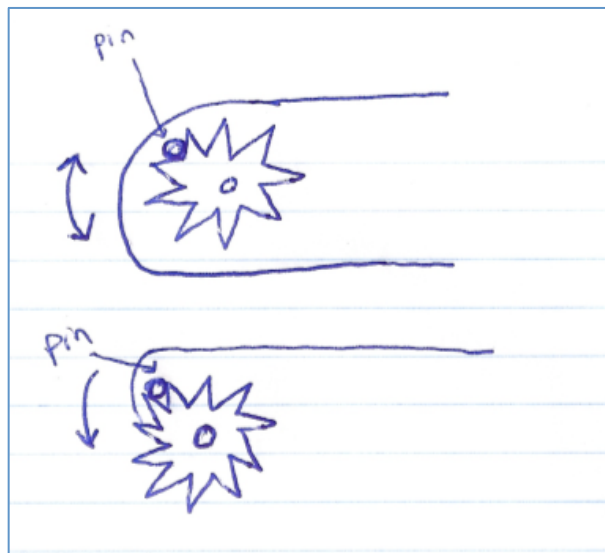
Locking Pin Idea. This design consists of a spring-loaded pin that can hold the gear in place but can be overridden with enough force.
